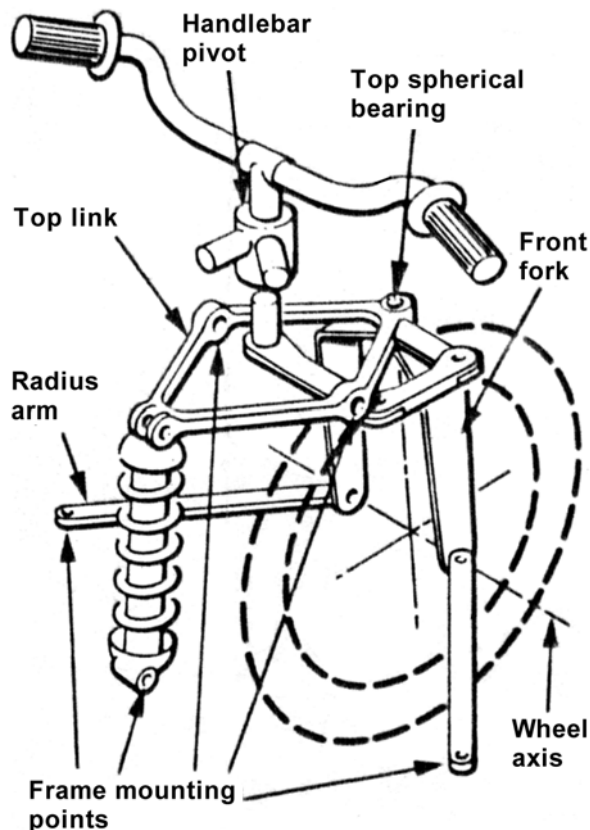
This design by Mike Loasby, a car engineer, features a combination of the four-bar linkage at axle height and a single ball joint centrally disposed above the wheel. So the steering axis passed through a fixed location above the wheel and a virtual centre at the axle. Due to a leverage effect, the ground projection of the motion will be approximately double that at the axle. However, another interesting motion takes place, as the steering is turned the lower part of the tyre moves sideways more than the top. Therefore increasing the camber angle into the direction of a road curve. This may help speed up corner lean-in during the initial countersteering phase.
